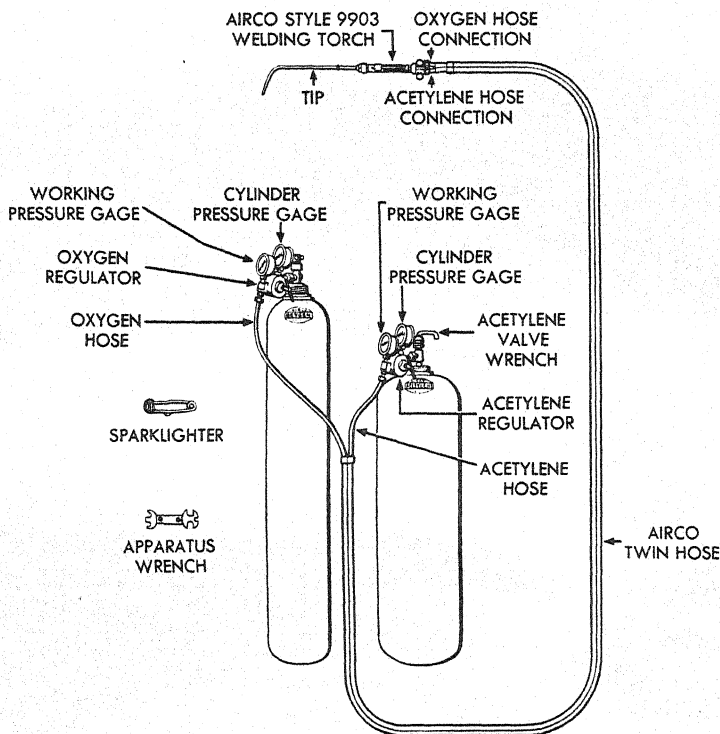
Airco oxyacetylene cutting and welding outfit.
